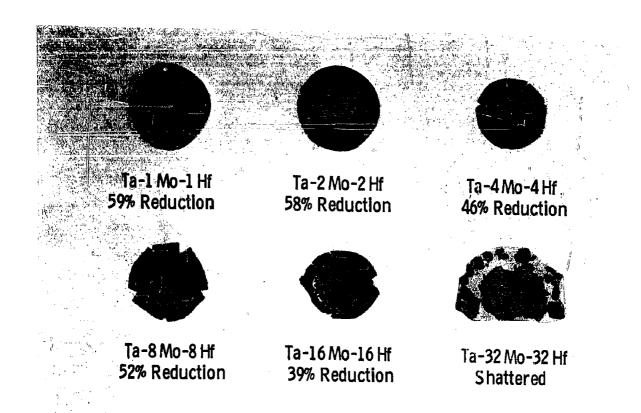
Arc melted Tantalum - Molybdenum - Hafnium buttons after hammer forging at 1200°C.
